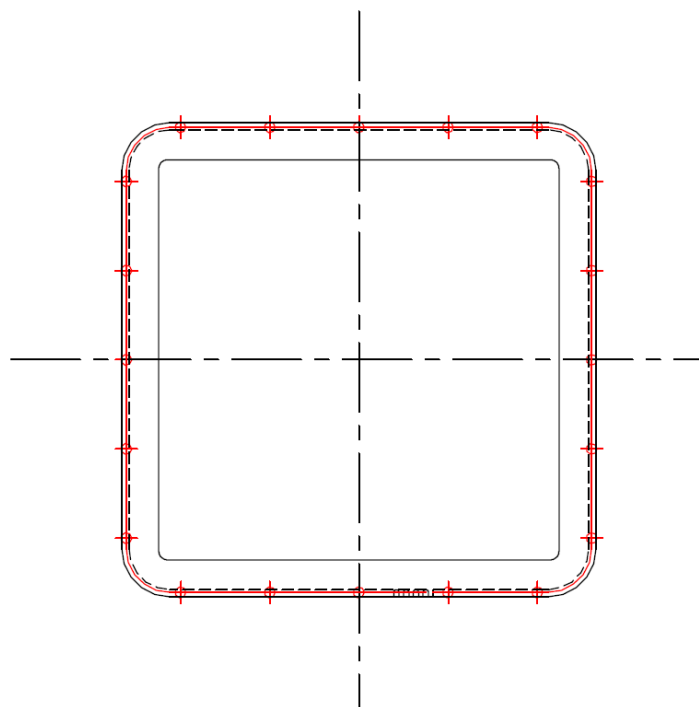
Cross section of mould with indicated sensor positions (red crosses) for horizontal measurement strands.
